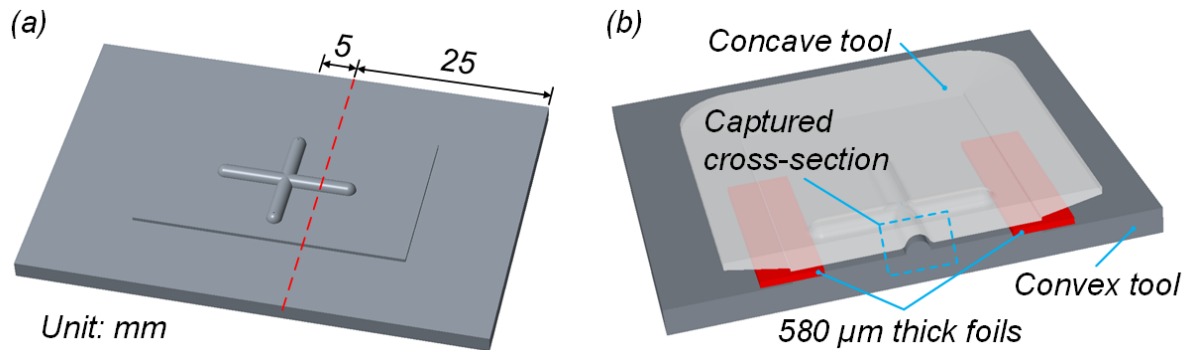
Tools were cut along the red dash line (a) and 580 μm thick foils were sandwiched between cut concave tool and convex tool to observe the cross-sections of tool pairs (b).
